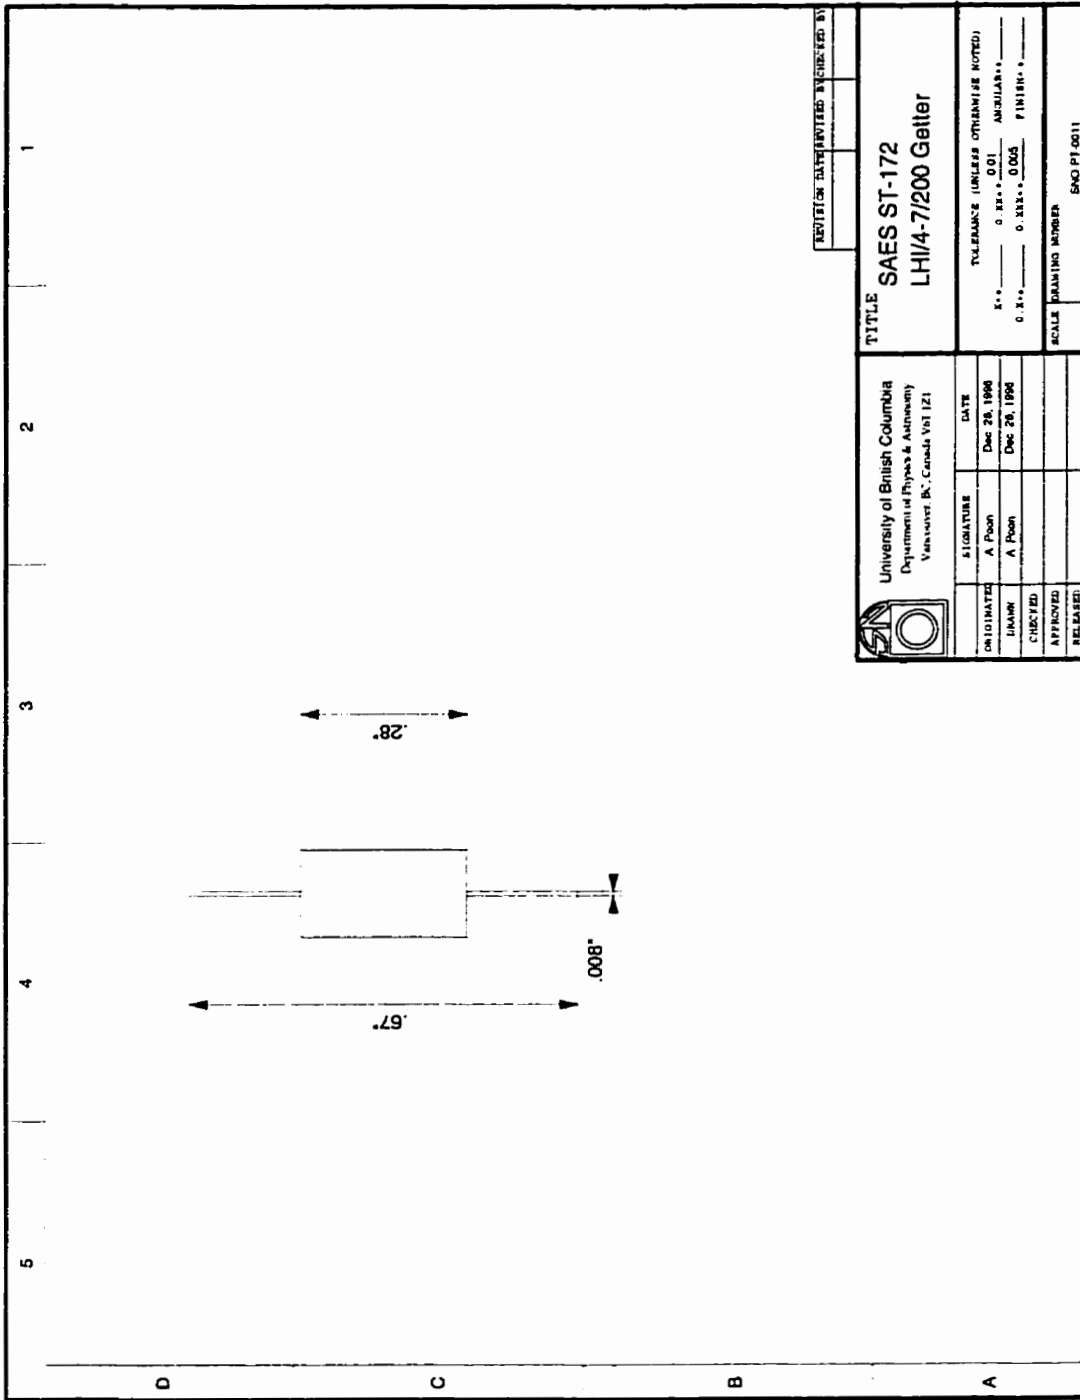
Technical drawing of the getter used in the  $pT$  source. This getter is manufactured by SAES Getters, Inc. (SNO-PT-0011).
